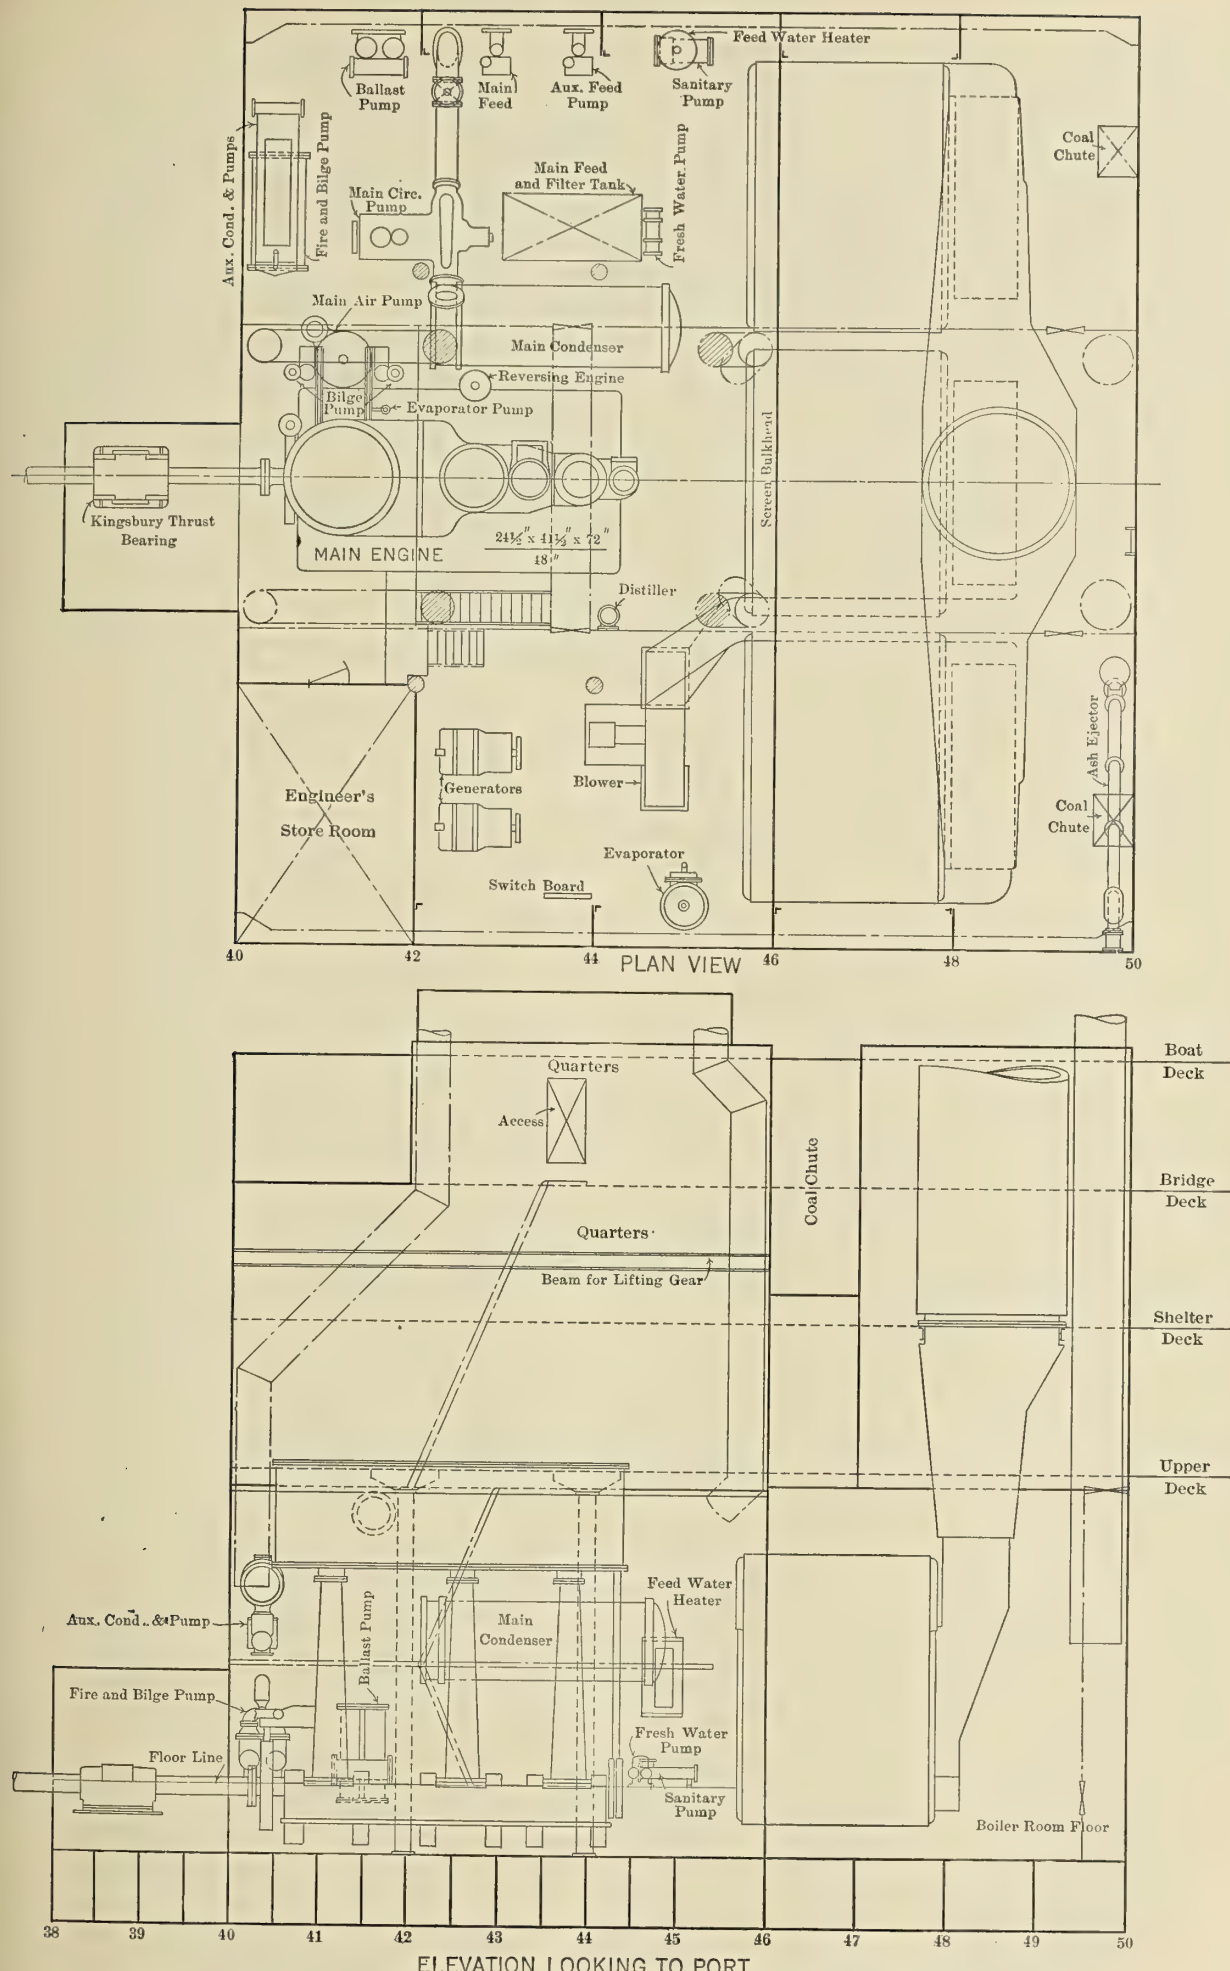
Machinery Arrangement for 9,600-Ton Cargo Steamer Driven by Reciprocating Engine
